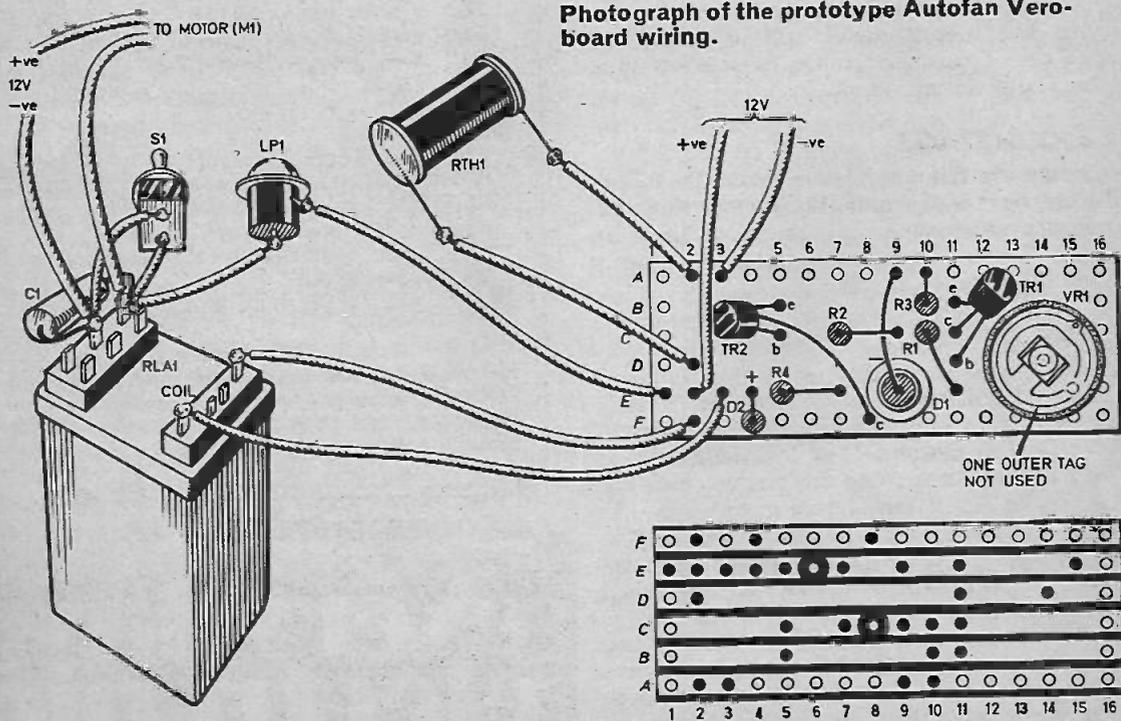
Complete layout and wiring of the Autofan unit. RTH1 is mounted on the engine.
